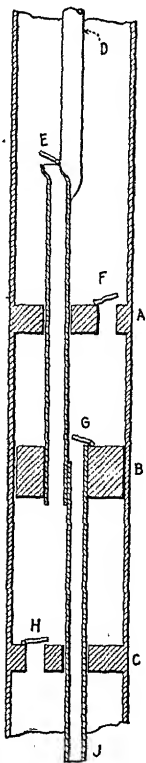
A.—Diagrammatic section through a double acting deep well pump cylinder.
